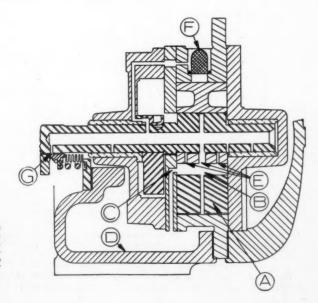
DETAILS OF THE FORCED FEED OIL SYSTEM EM-PLOYED BY THE LAN-DERS FRARY & CLARK, UNIVERSAL DOMES. TIC COMPRESSOR.
